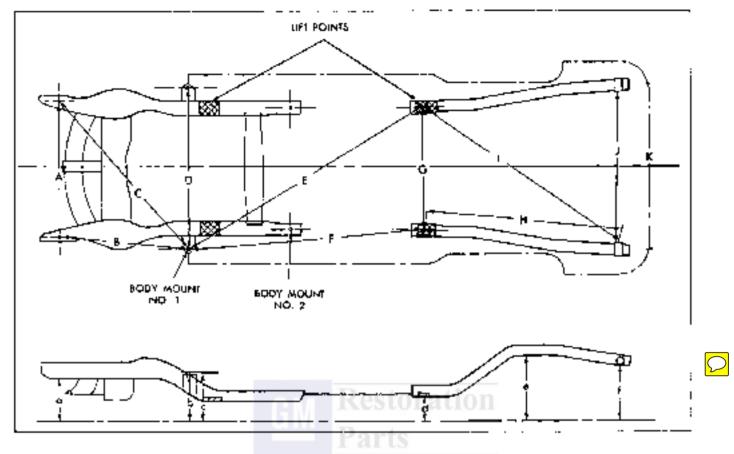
Firebird Checking Dimensions, Lift Points and Body Bolt Encorions
